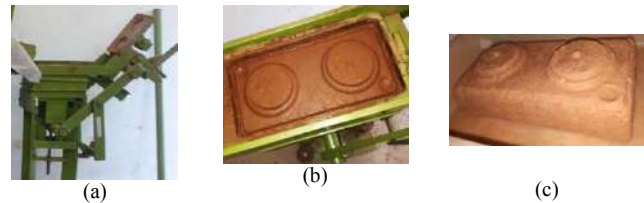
Moulding of blocks: (a) manual press, (b) molded soft block, (c) finished product.
